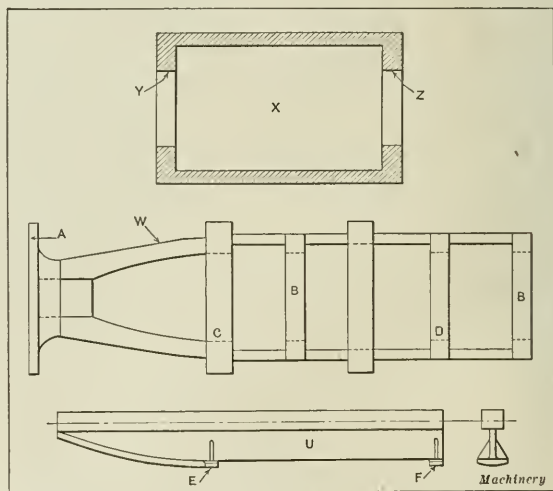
Test Pieces used in determining Accuracy of Actual Machining Operations
